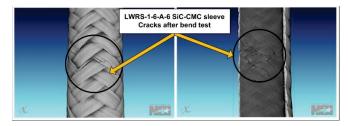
Post bend test 3D tomography results of the 5 cycle, 1-ply (LWRS-1-6-A-6) SiC-CMC sleeve specimen showing cracks.
